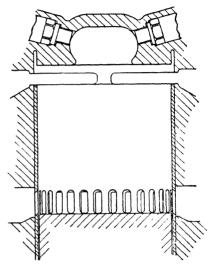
Single-piston sleeve-valve engine uniflow scavenge
